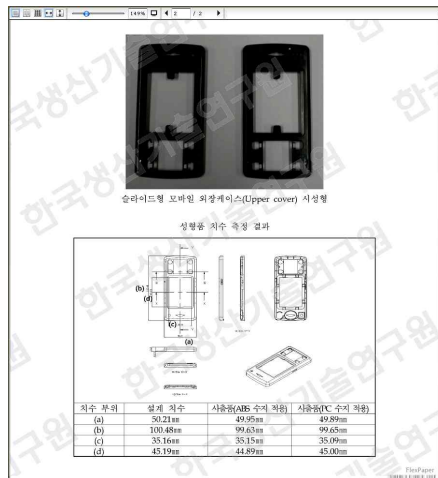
Standard drawings of injection mold for slide-type mobile phone case
